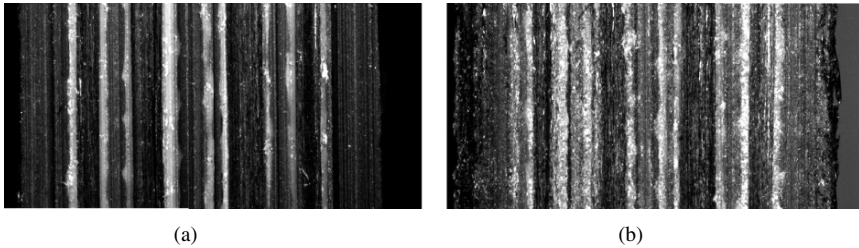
Topography of the machined surface for CFRP multidirectional laminate. Cutting tool diameter = 12.7 mm, grit size = 30, depth of cut = 6.35 mm, spindle speed = 4,000 rpm, machining direction is from *top to bottom*, (a) feed rate = 0.254 m/min, $h_q = 0.01$ mm, (b) feed rate = 0.762 m/min, $h_q = 0.03$ mm
